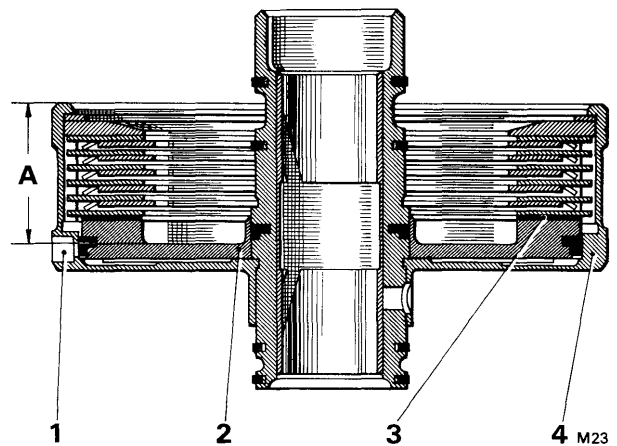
CHECKING CENTRE CLUTCH PISTON TRAVEL
